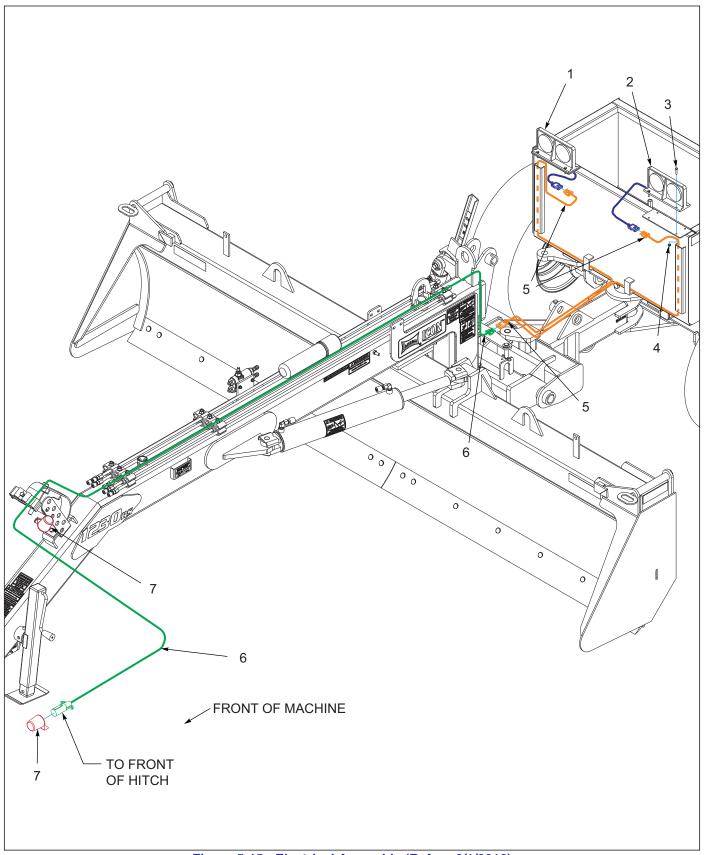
Electrical Assembly (Before 6/1/2016)
